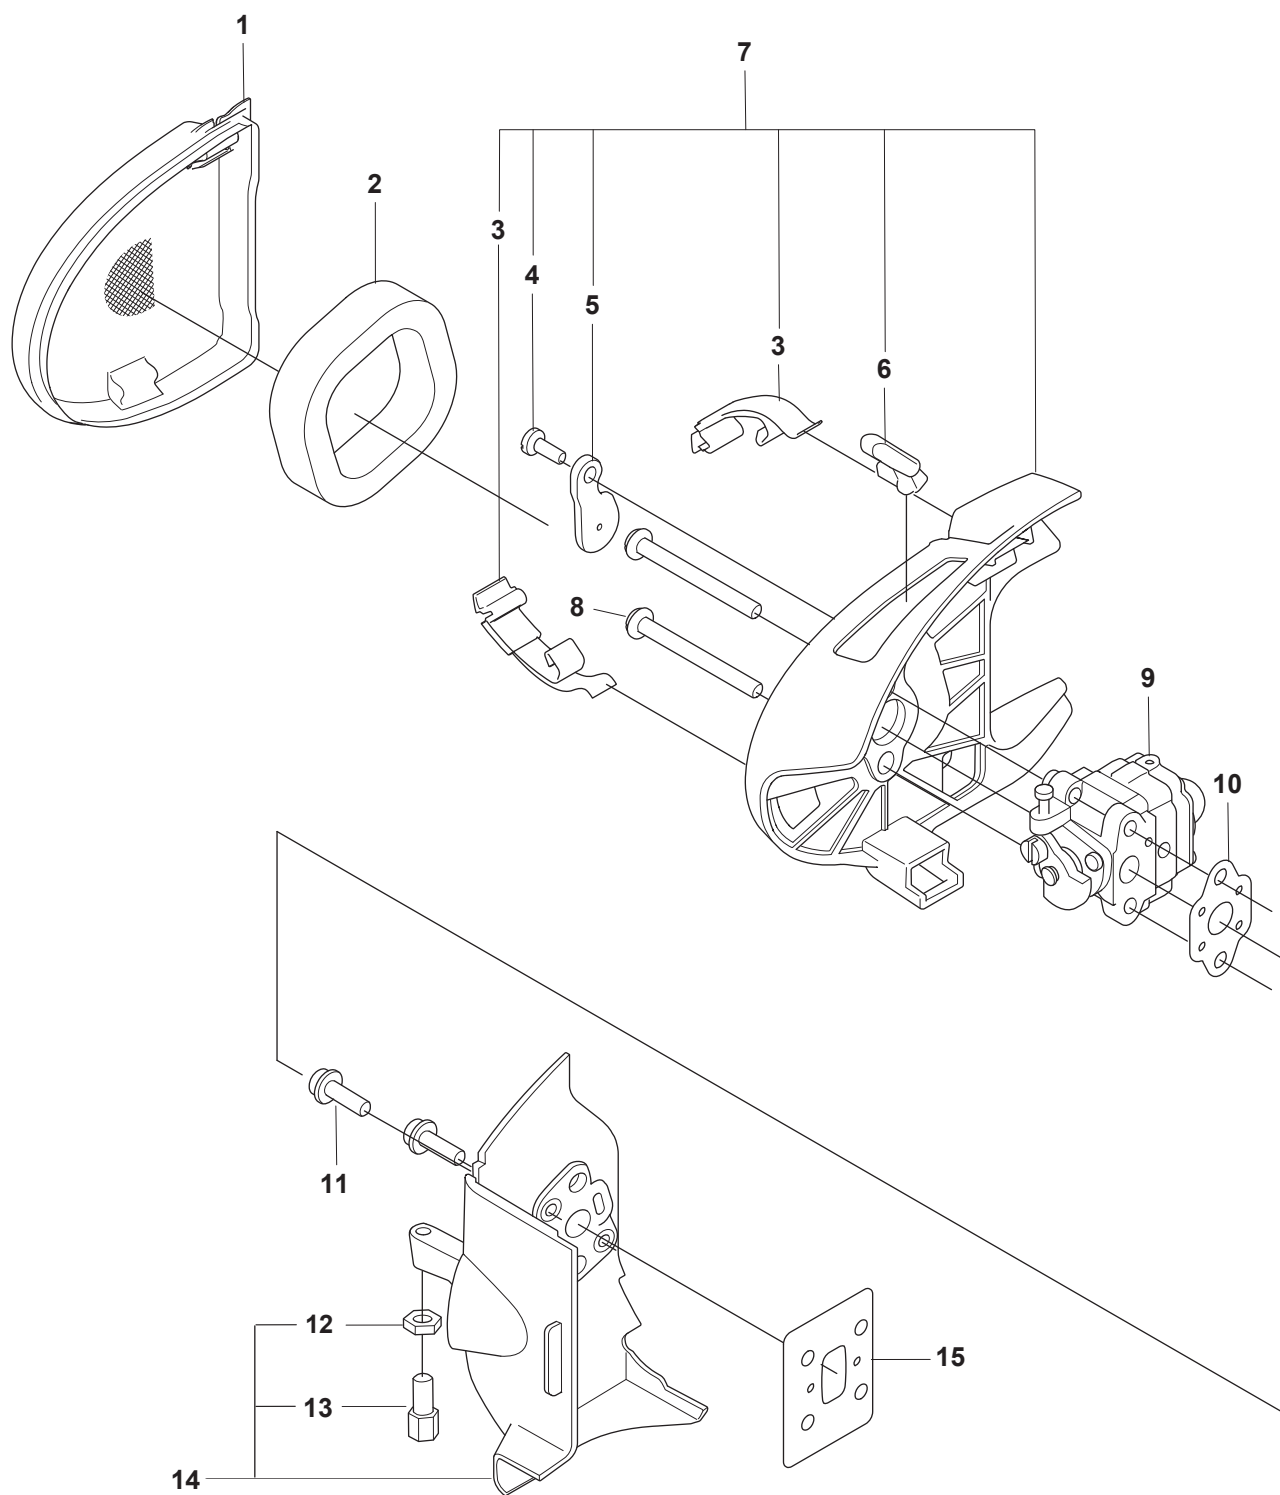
Fig. C CARBURETTOR & AIRFILTER HT220-75, CHT220-60
